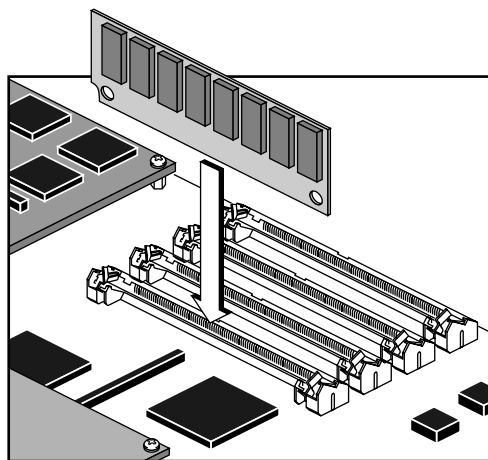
Inserting an SP Memory Module on the Phoenix SP Board
